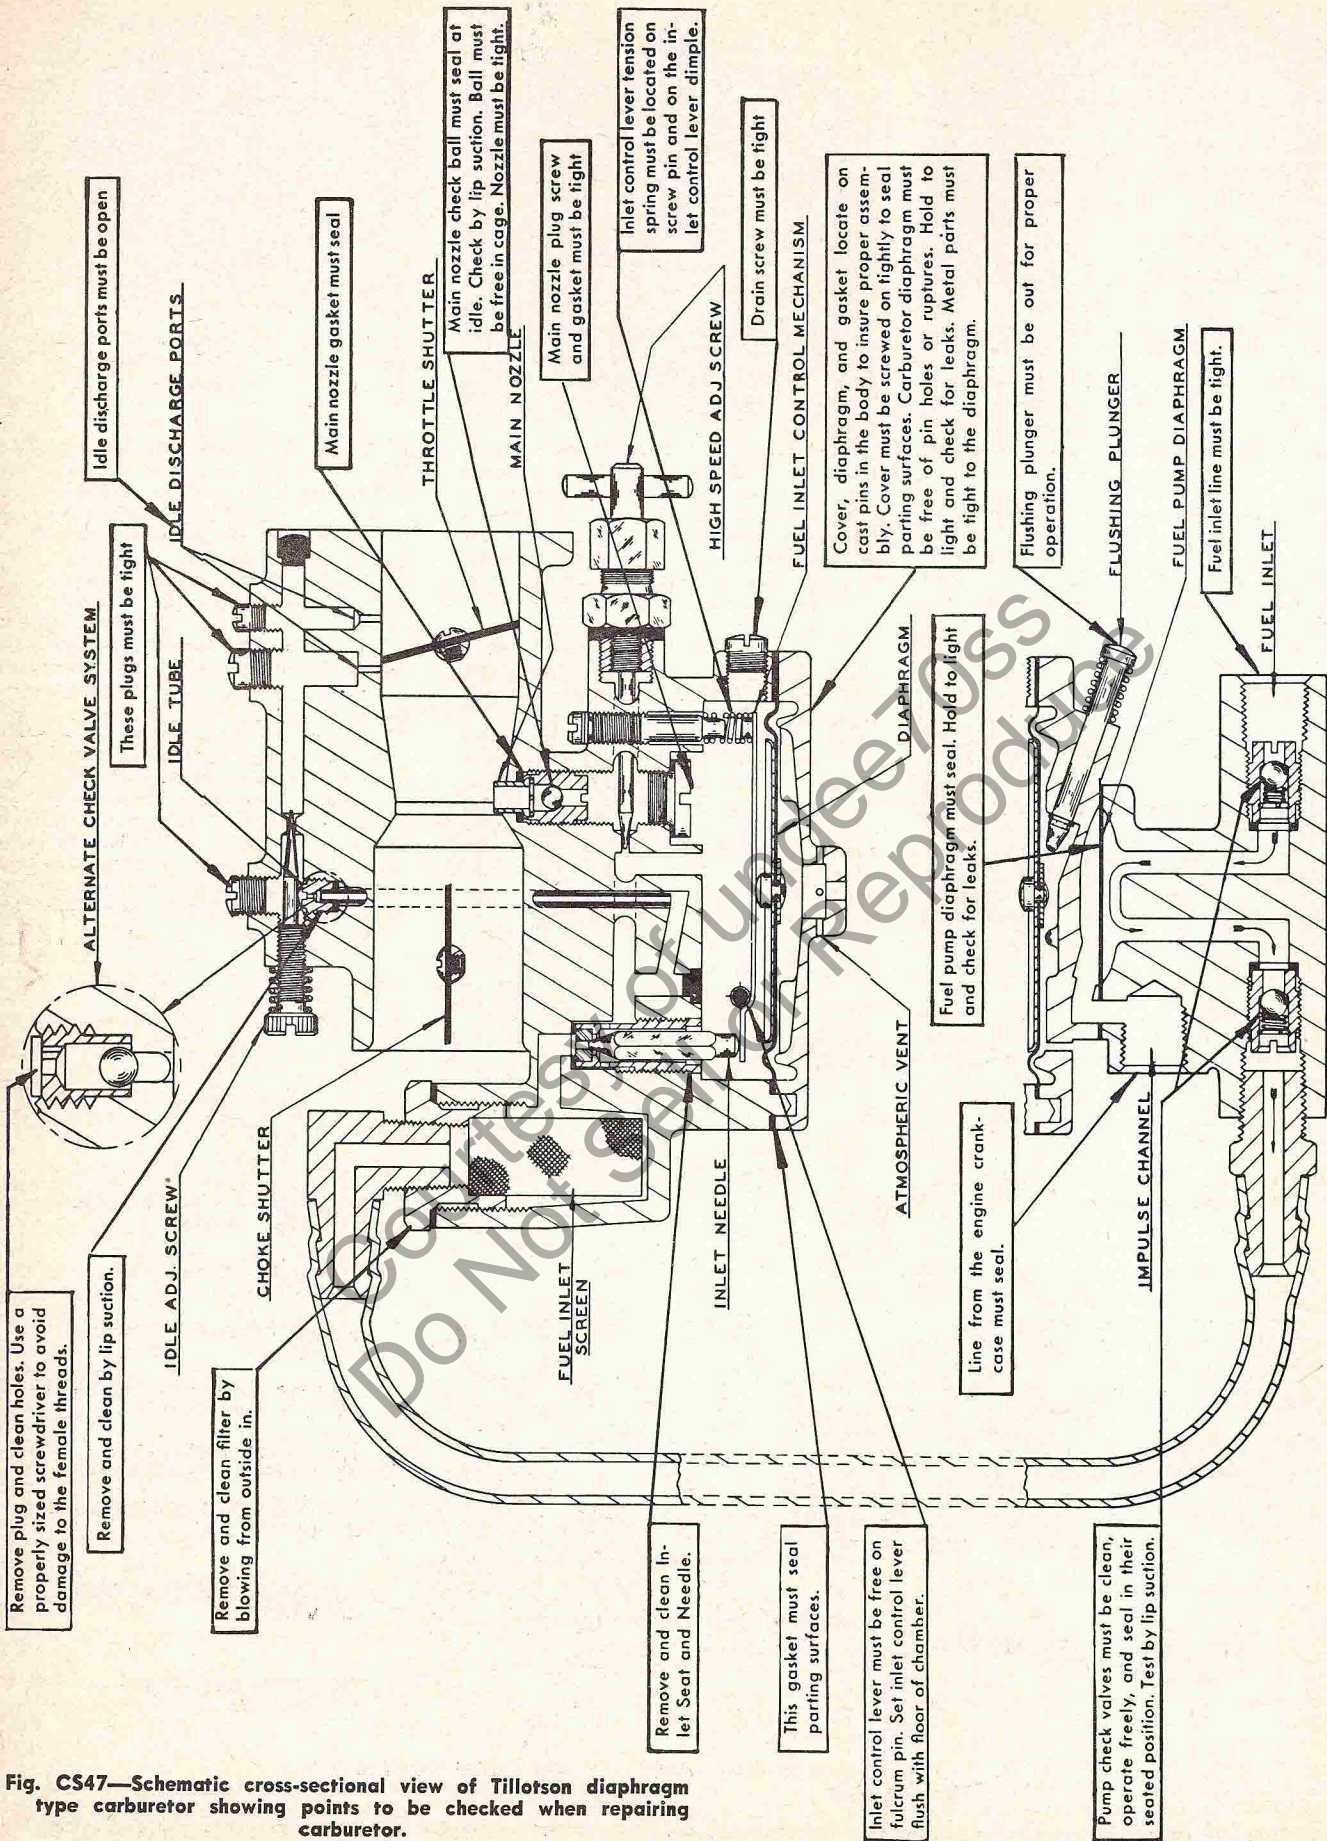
Schematic cross-sectional view of Tillotson diaphragm type carburetor showing points to be checked when repairing carburetor.
